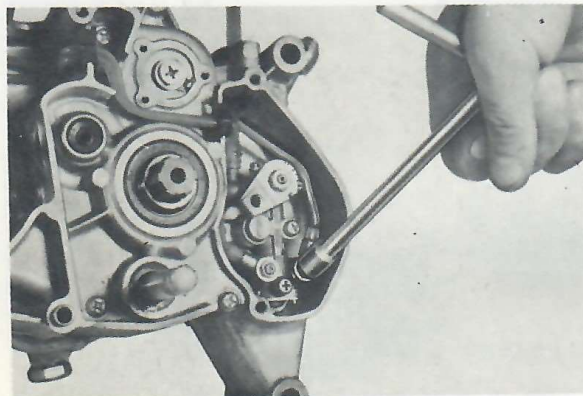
Unscrewing oil line union bolt with 8 mm wrench
